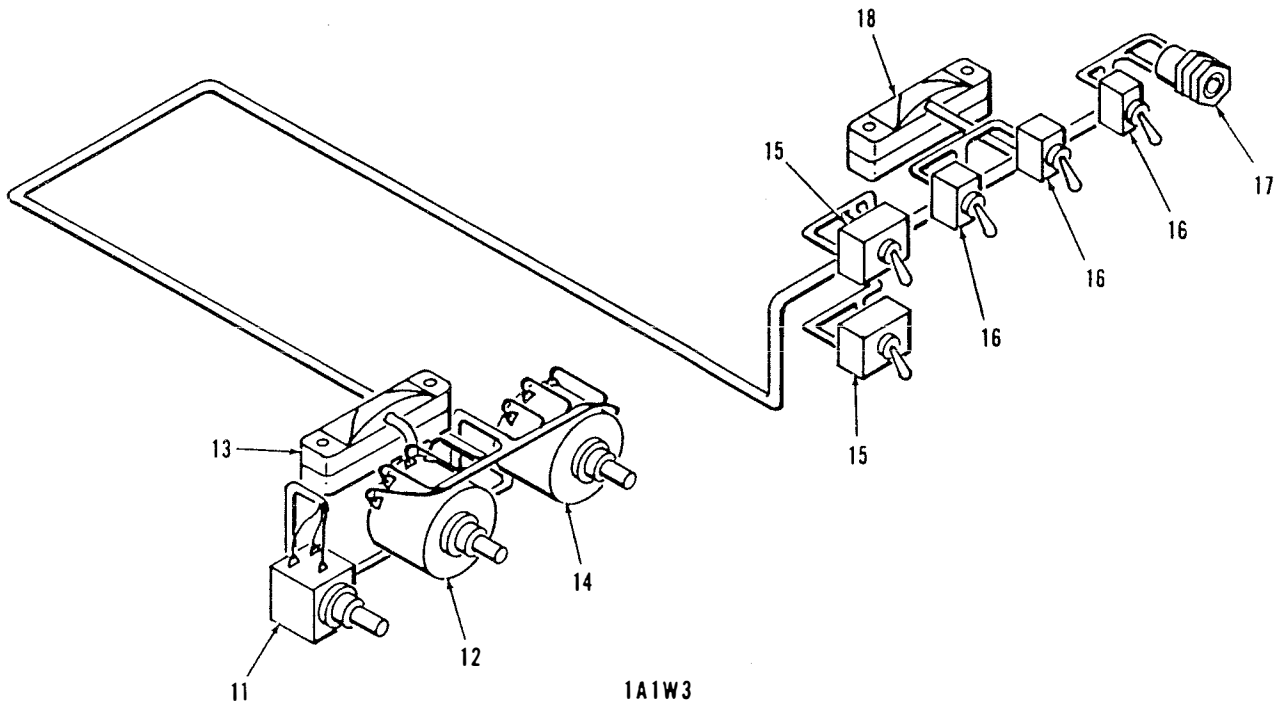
Converter Cable Assemblies (Sheet 2 of 2)
